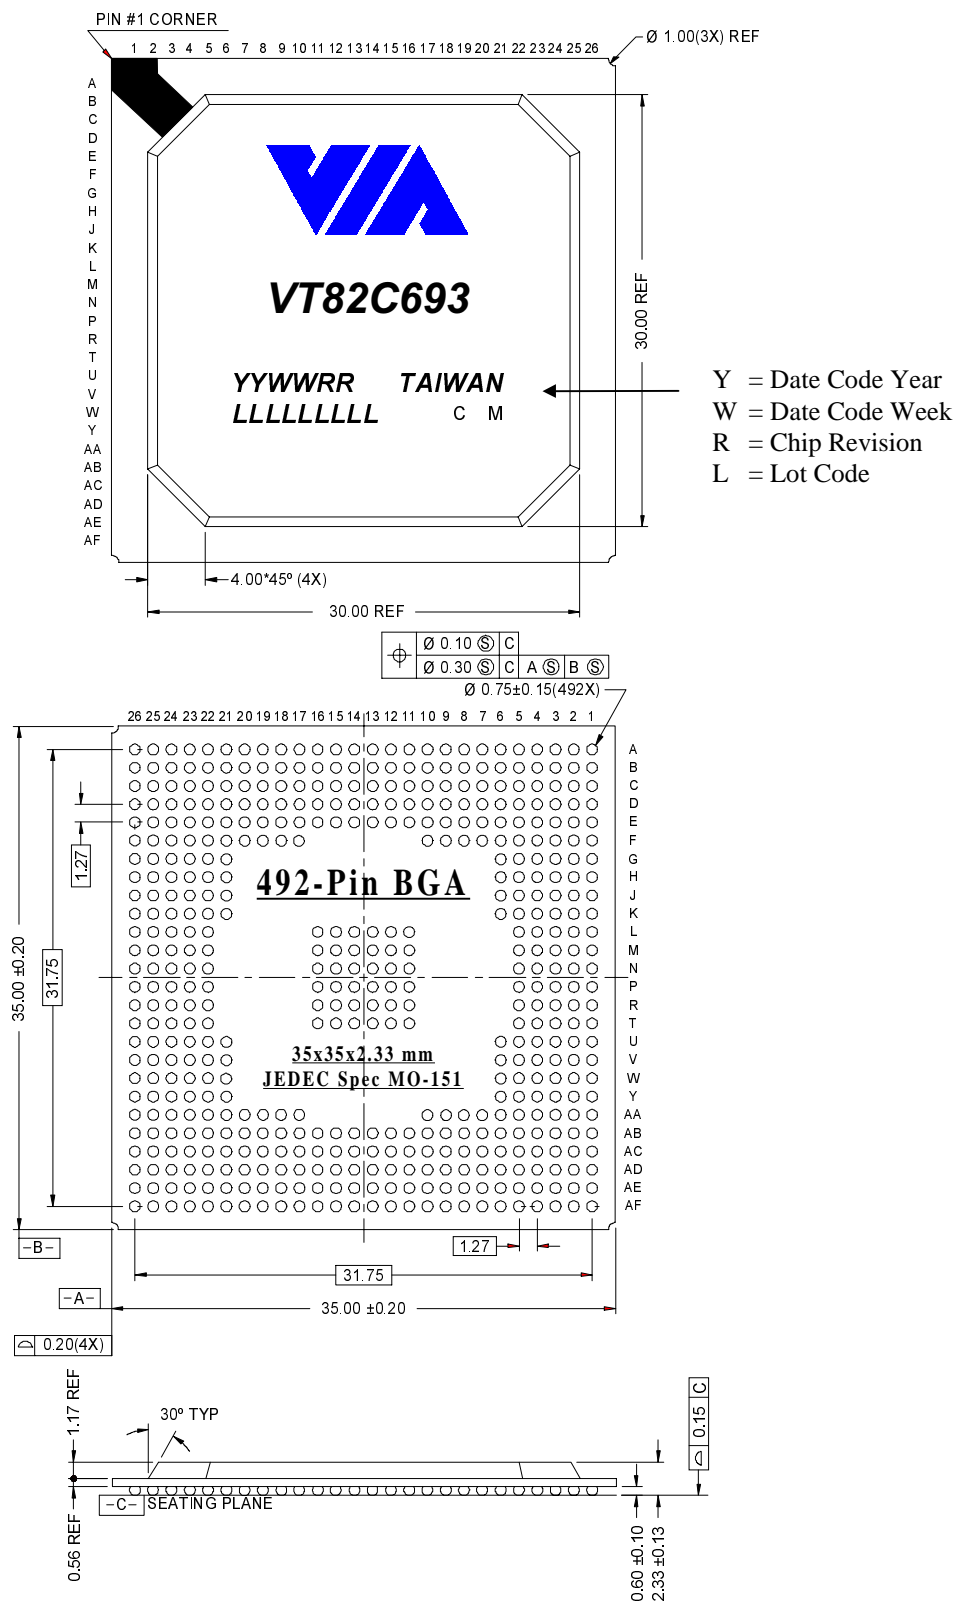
Mechanical Specifications - 492-Pin Ball Grid Array Package
